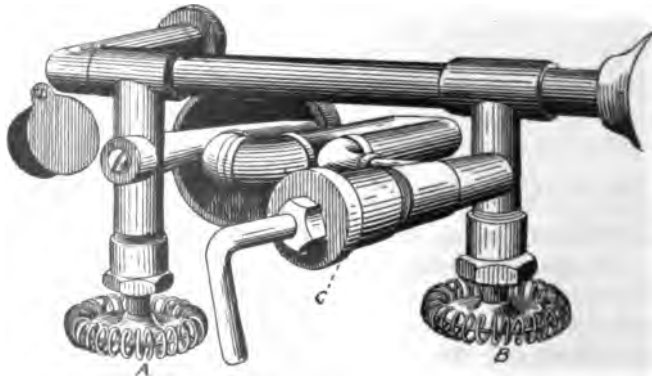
Showing the torch in position. By reference to Fig. 317, it may be readily understood that the head of the torch, C, is attached to a nipple on B by screw, G; the bent tube being thrust through a port in the burner casing so as to come directly over the fire; the nozzle entering the mixing tube by the side of the nozzle on the main valve, A.
